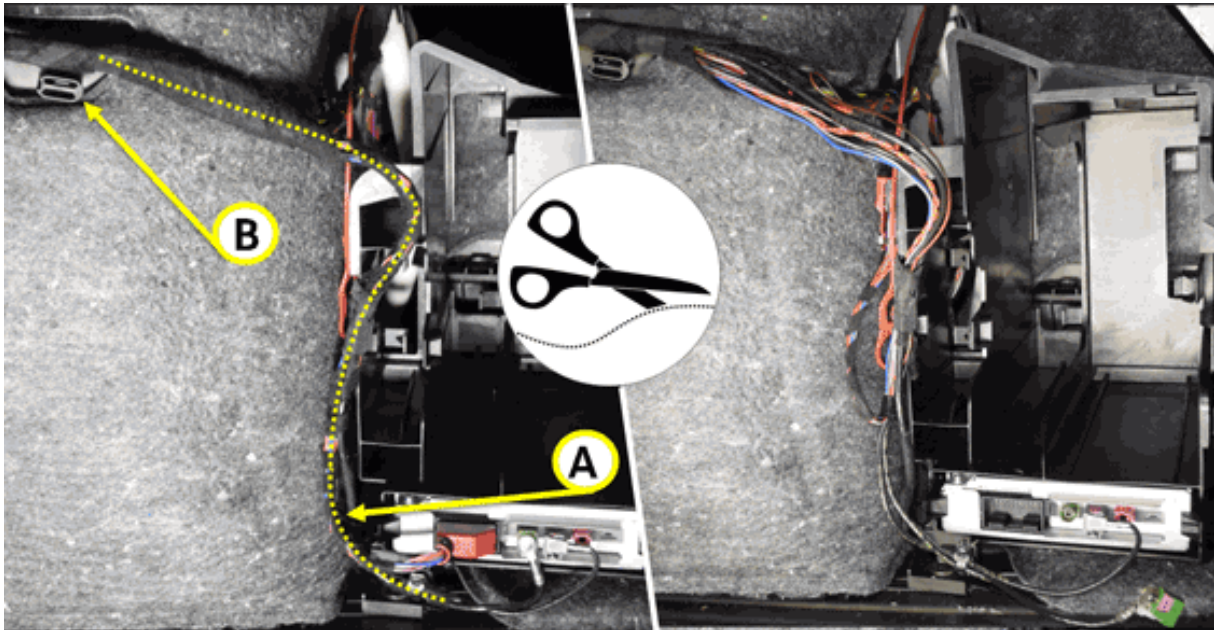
Remove the fleece tape along the body harness (A). Utilize lacing tape cutters, or similar tooling when removing the fleece tape to help ensure that there is no damage to the wire harness. The harness body retainer clip (B) should remain in place to ensure proper harness length during the repair.
